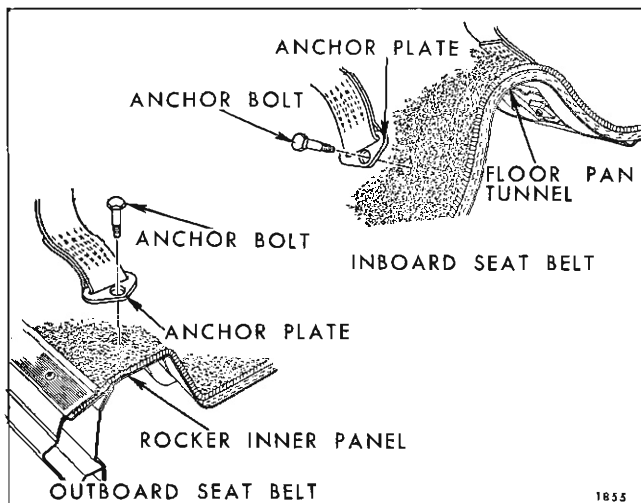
H36—Standard Seat Belt Attachments - All except 68000 Series
